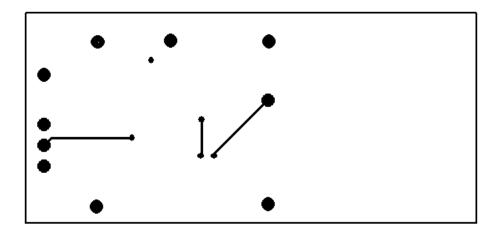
SP6648LEDEB PC LAYOUT BOTTOM SIDE
